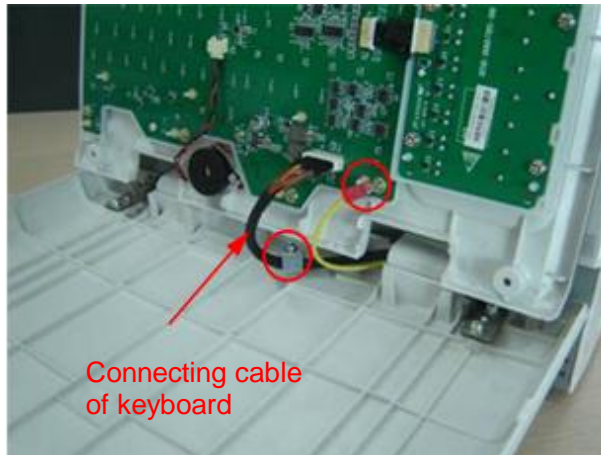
Disassembly of Top Cover Assembly of Keyboard (2)
